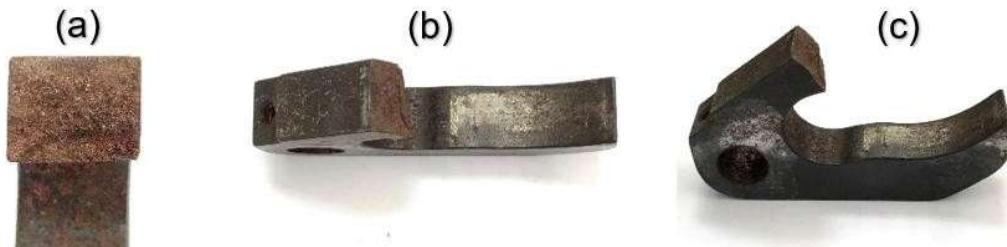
Sample A, (a) fracture surface detail, (b) top view, and (c) side view.
